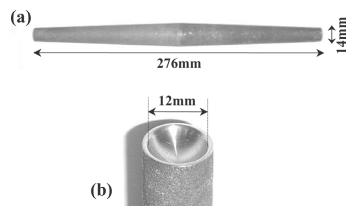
Double-taper shape clad buffer rod: (a) external view, and (b) spherical ultrasonic lens fabricated at the probing end of the rod.
